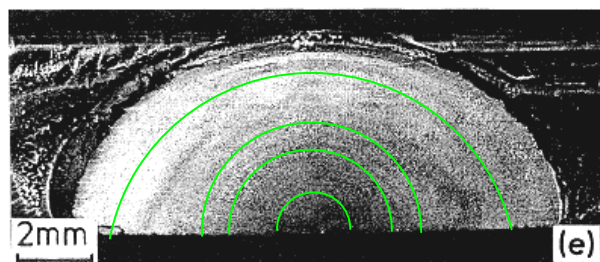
shows a fracture surface of an internal pressure test on an old pipe which has been used in service since 1988 (Table 2.1) and which was tested in 2009. Slow crack growth starts at an inherent defect at the inner pipe surface. The markings at very small crack lengths confirm a nearly semi-circular crack front geometry. With increasing crack length the plain stress situation at the inner pipe surface allows for larger plastic deformations which retard SCG. In the center of the pipe wall plain strain conditions prevail and ensure a higher constraint with continuing SCG. When the crack front approaches the outer pipe surface the plain stress condition again allows for larger plastic deformations which are crack retarding. Meanwhile, the crack in the center of the pipe wall is still growing in a quasi-brittle manner in the direction of the pipe axis until final breakdown with ductile failure at the outer pipe wall occurs.
